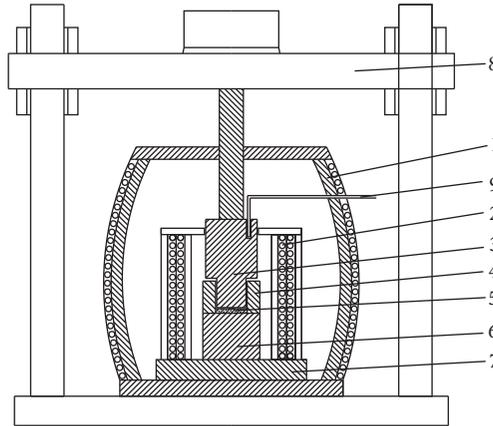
The diagram of the hot-pressing technique in a vacuum environment. 1, vacuum chamber; 2, heating furnace; 3, pestle; 4, shell mold; 5, pressing material; 6, mortar; 7, pedestal; 8, pressing table; 9, thermocouple.
